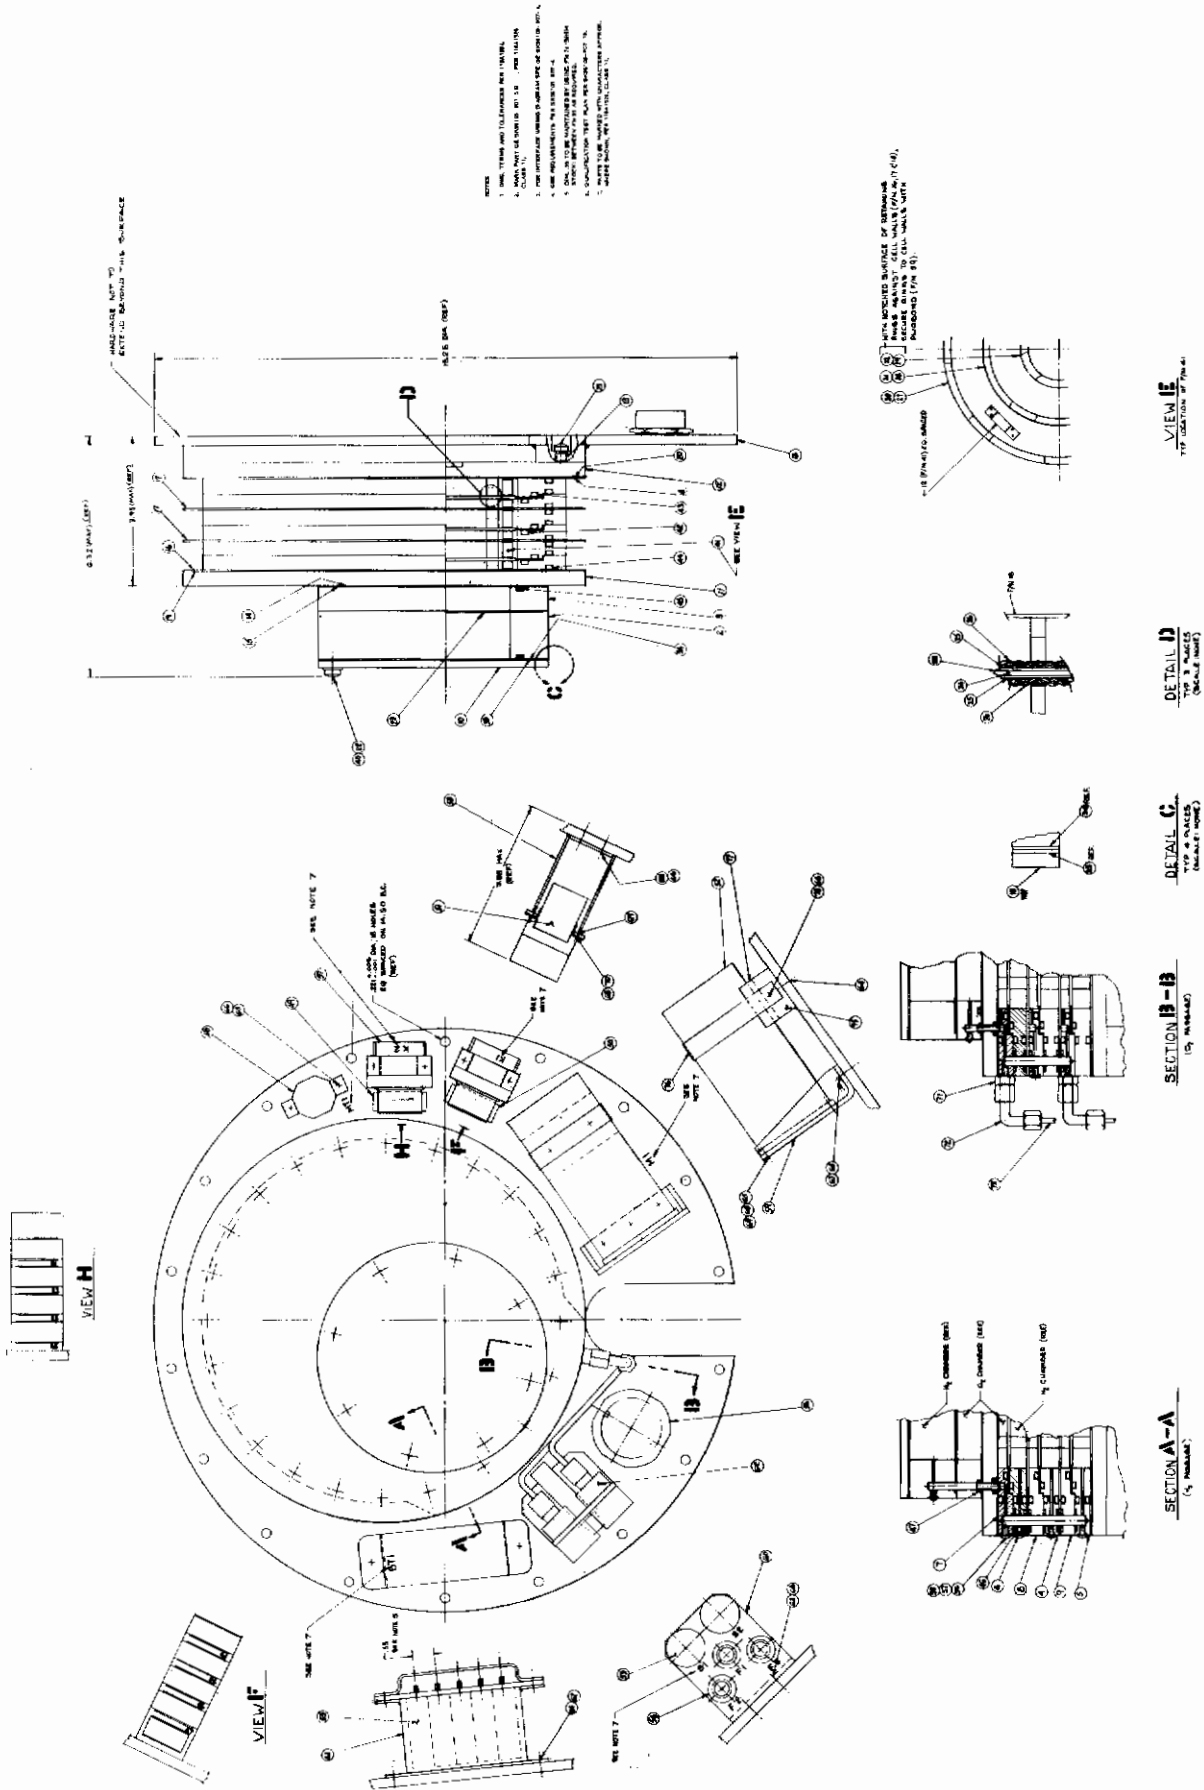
RVX Fuel Cell Flight Module Assembly Drawing
